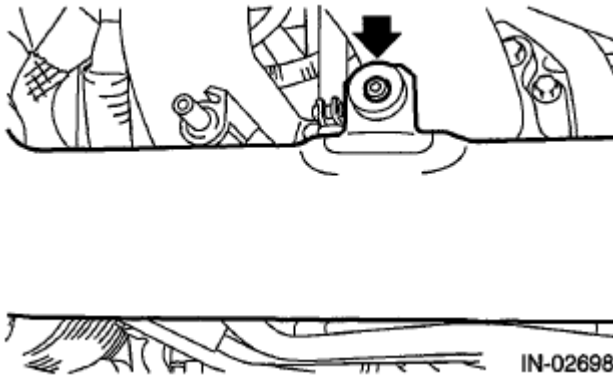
Locating Blow-By Pipe Clamping Bolt And Vacuum Hose
